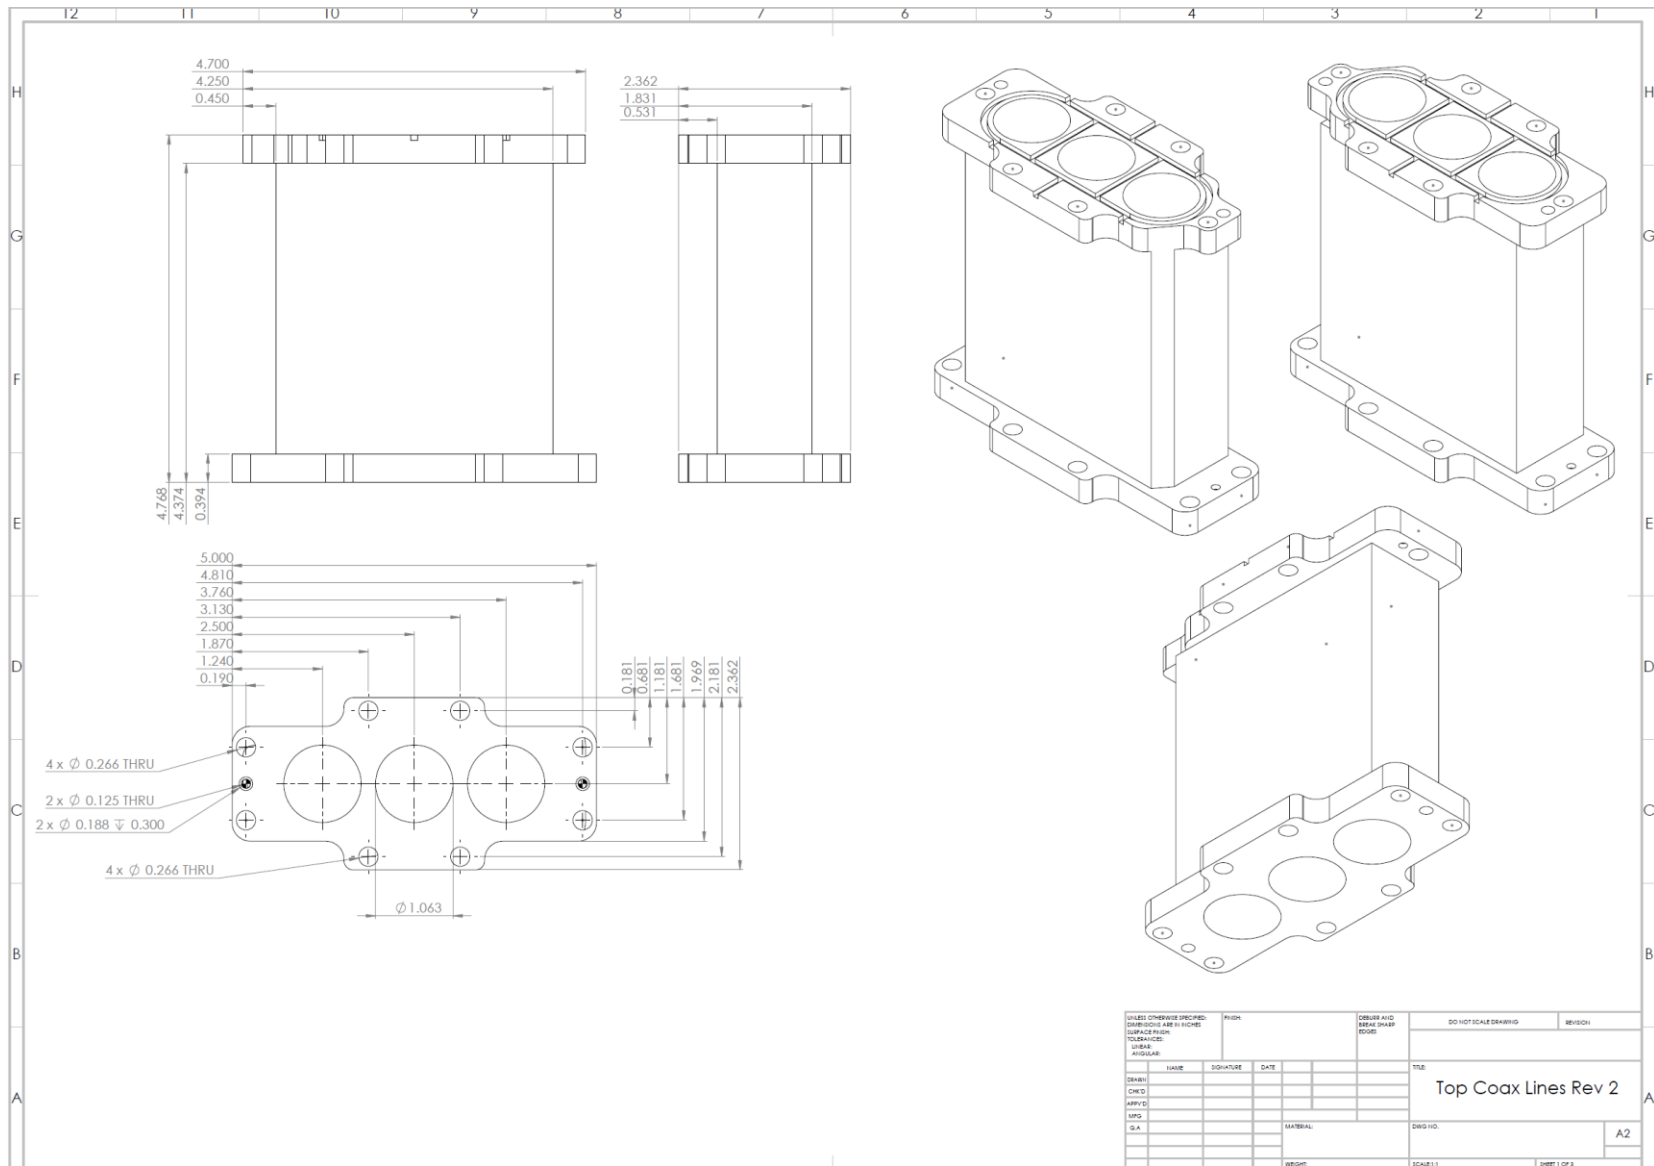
Coaxial line outer conductor that mates the SBO adaptor to the vacuum flange.
